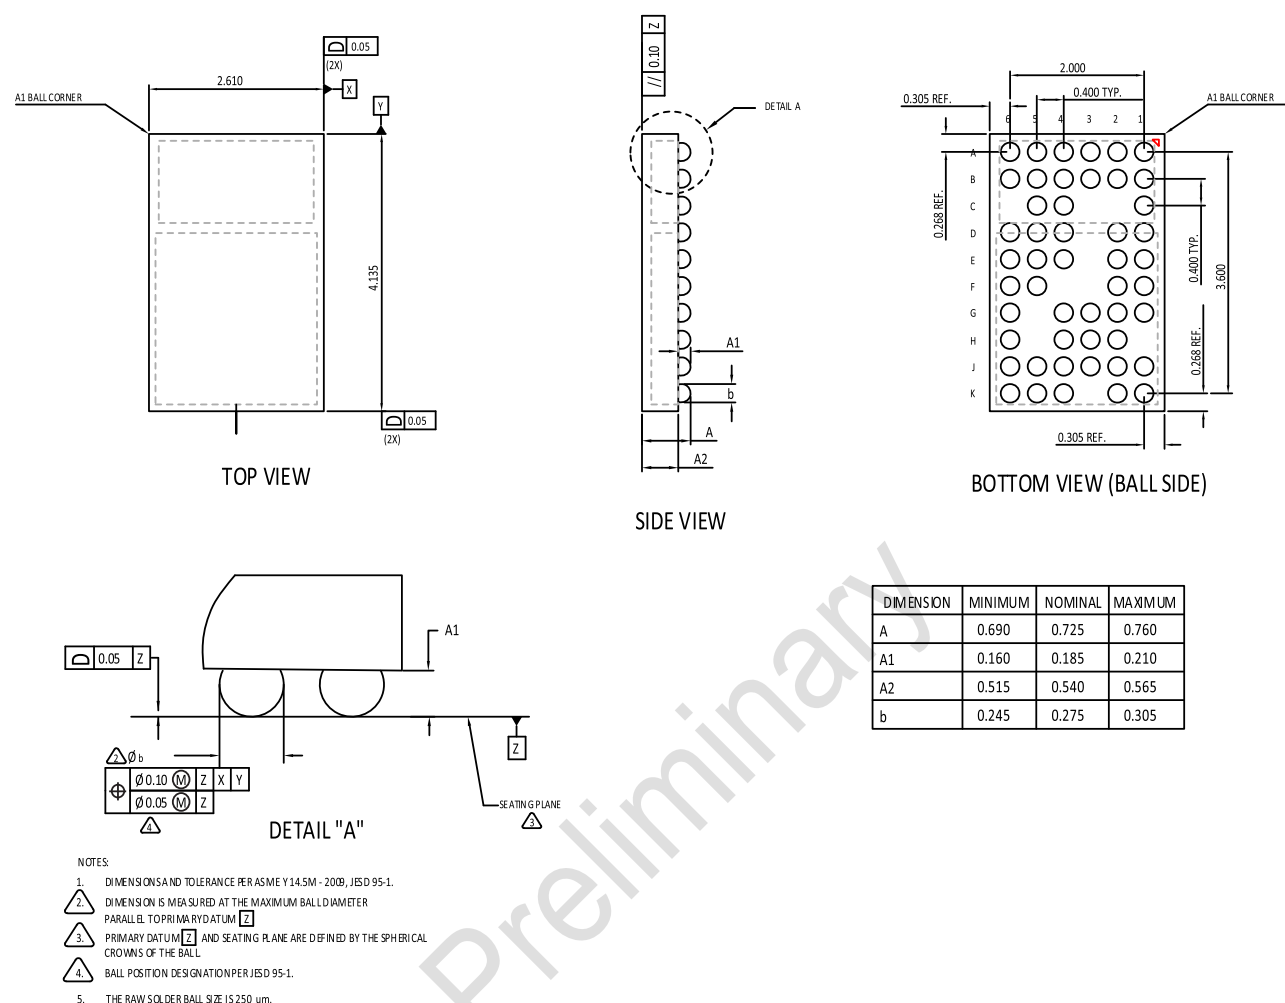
Package dimensions 49-pin eWLB 2.610 x 4.135 mm
